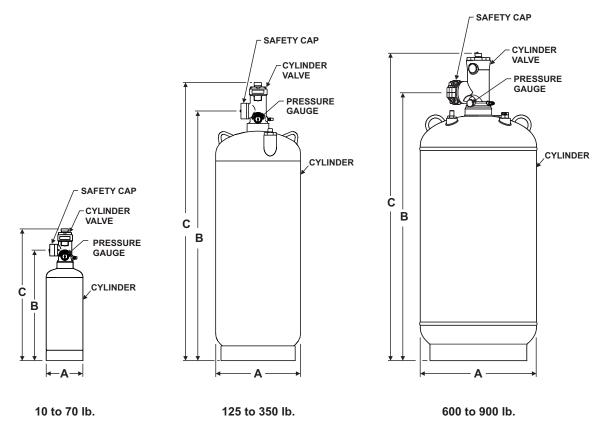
Typical Cylinder Assembly, 10 to 900 lb.
